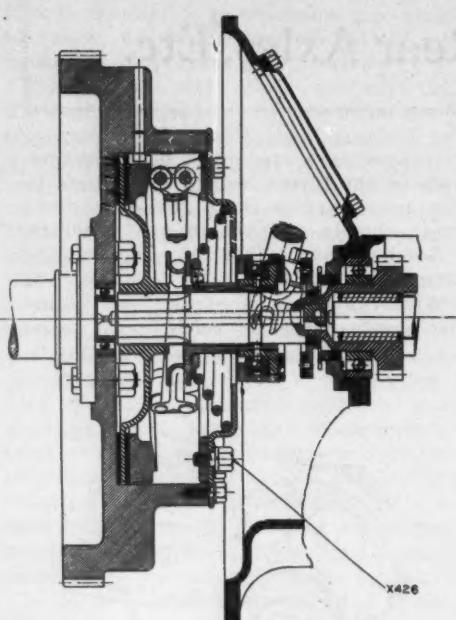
Sectional view of the clutch used on the 1915 Velie showing points of adjustment
